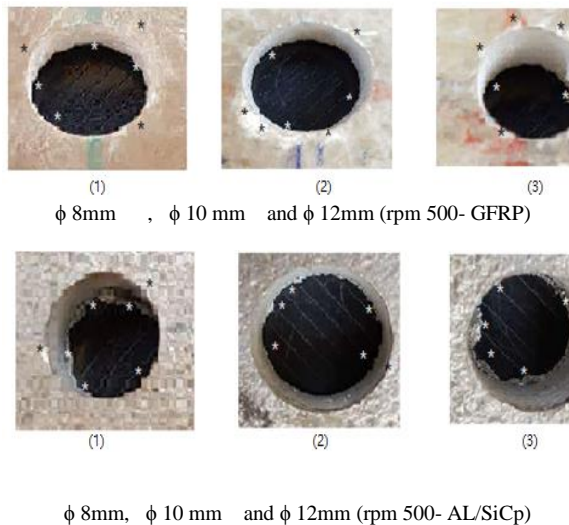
Defects at drilling holes of GFRP and AL/SiCp composites.
